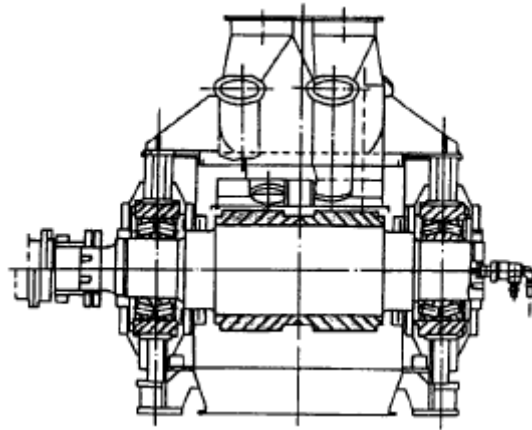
Briquetting machine with thermal sleeve and the cooling system pressure roller profile
